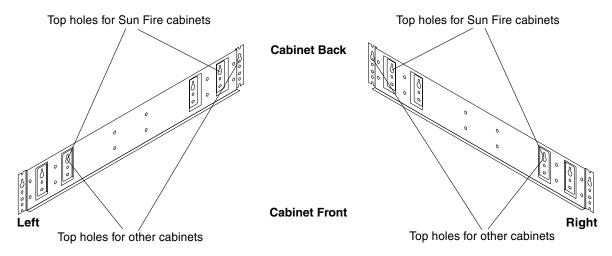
Top Holes for Securing the Mounting Bracket to the Cabinet
